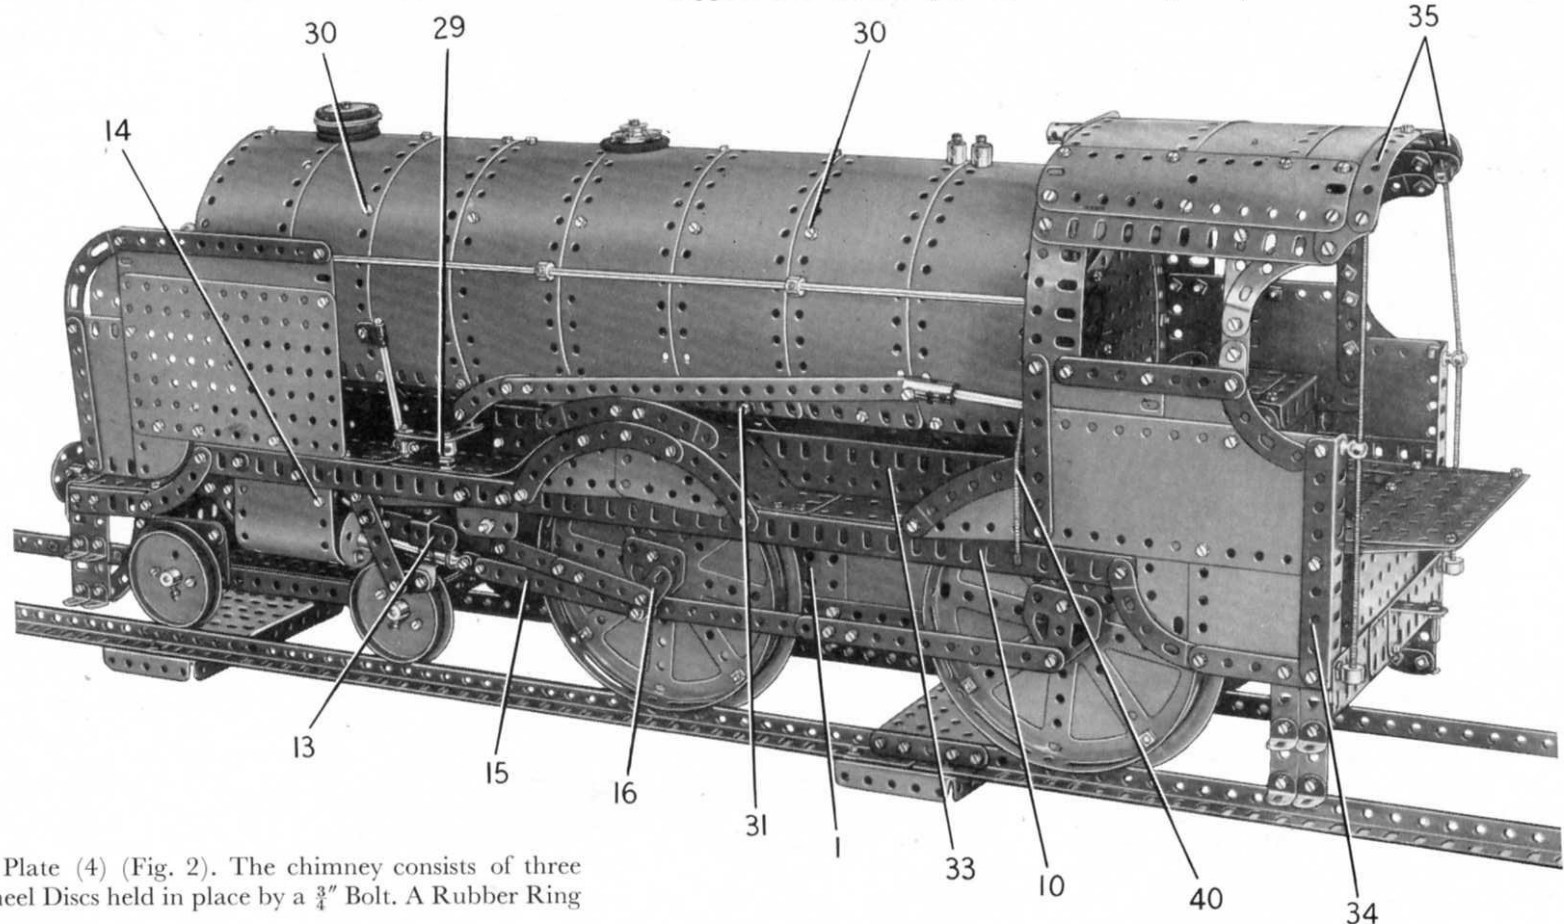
Details of the connecting and coupling rods and the arrangement of the main wheel driving cranks are shown in this illustration of the completed Locomotive
